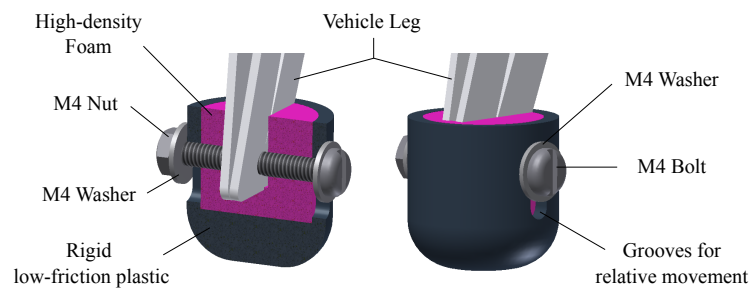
Details of the vehicle ‘feet’ design and assembly.
